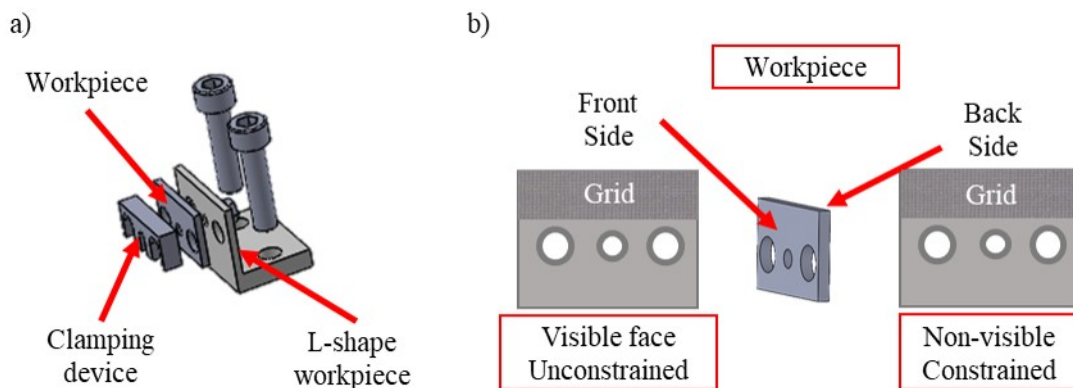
Scheme of the self-designed set-up to obtain plane strain conditions. a) Clamping device, workpiece and second (L-shape) workpiece; b) Focus on the workpiece with the grids created in both sides
